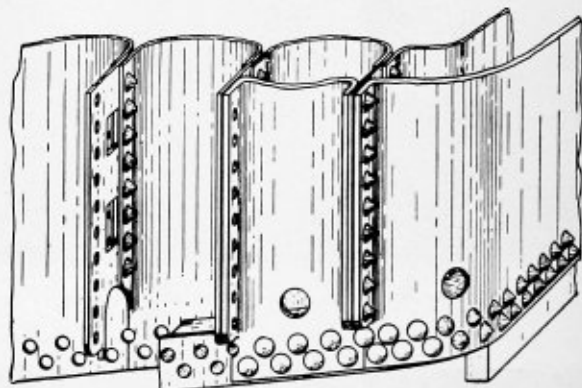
BUTT-WELDED JOINT AT MUD RING
